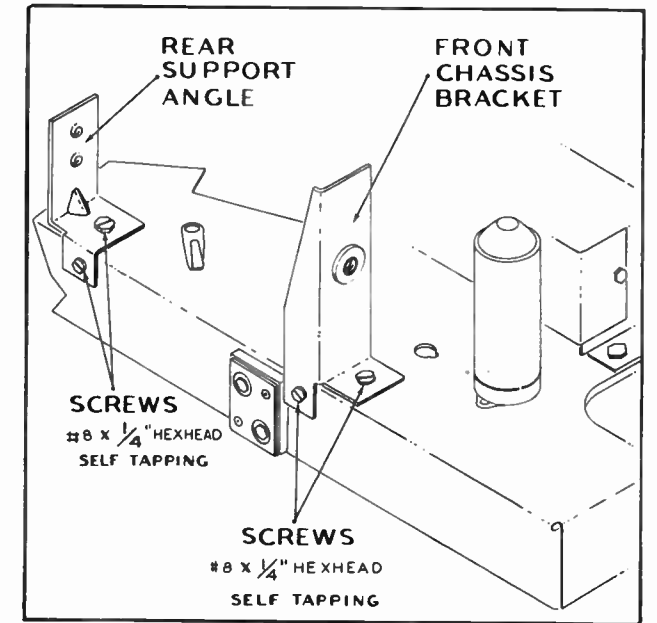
Placement of Mounting Brackets on R-F Chassis (Tuner-Adapter Part No. 43-6473)
